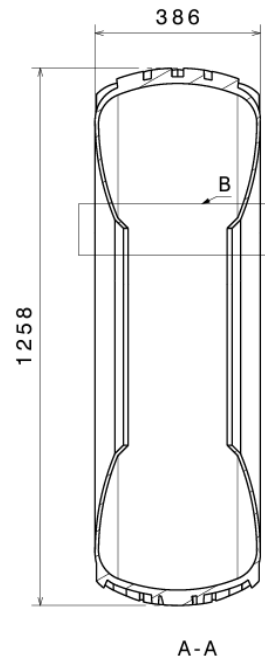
Sectional view of the wheel tyre showing internal packaging volume
